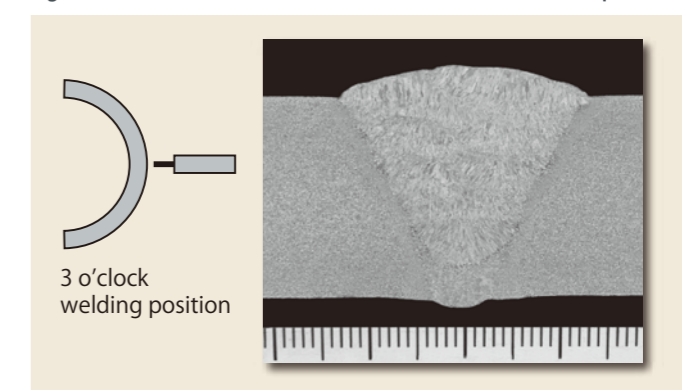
Bead appearance of the weld metal in the 3 o'clock position
